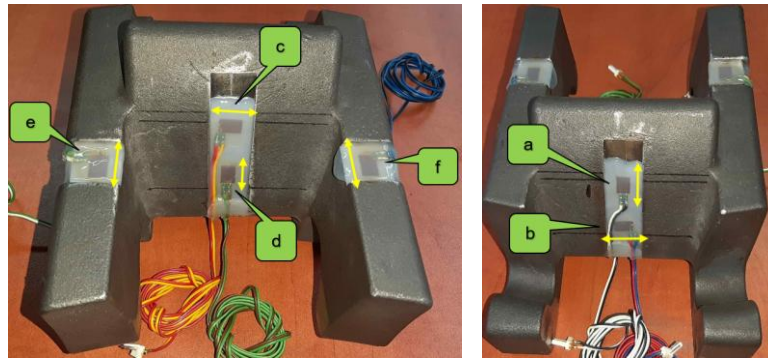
Tooth segment with six strain gauges glued on it (two on the tooth flank and one on each side surface)
